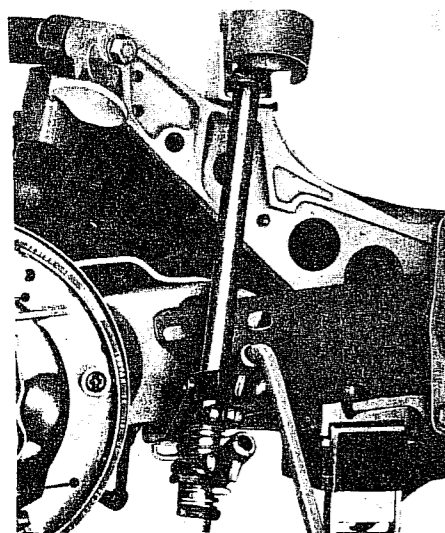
Lifting the spring plate into position with a jack - D/J axle.
